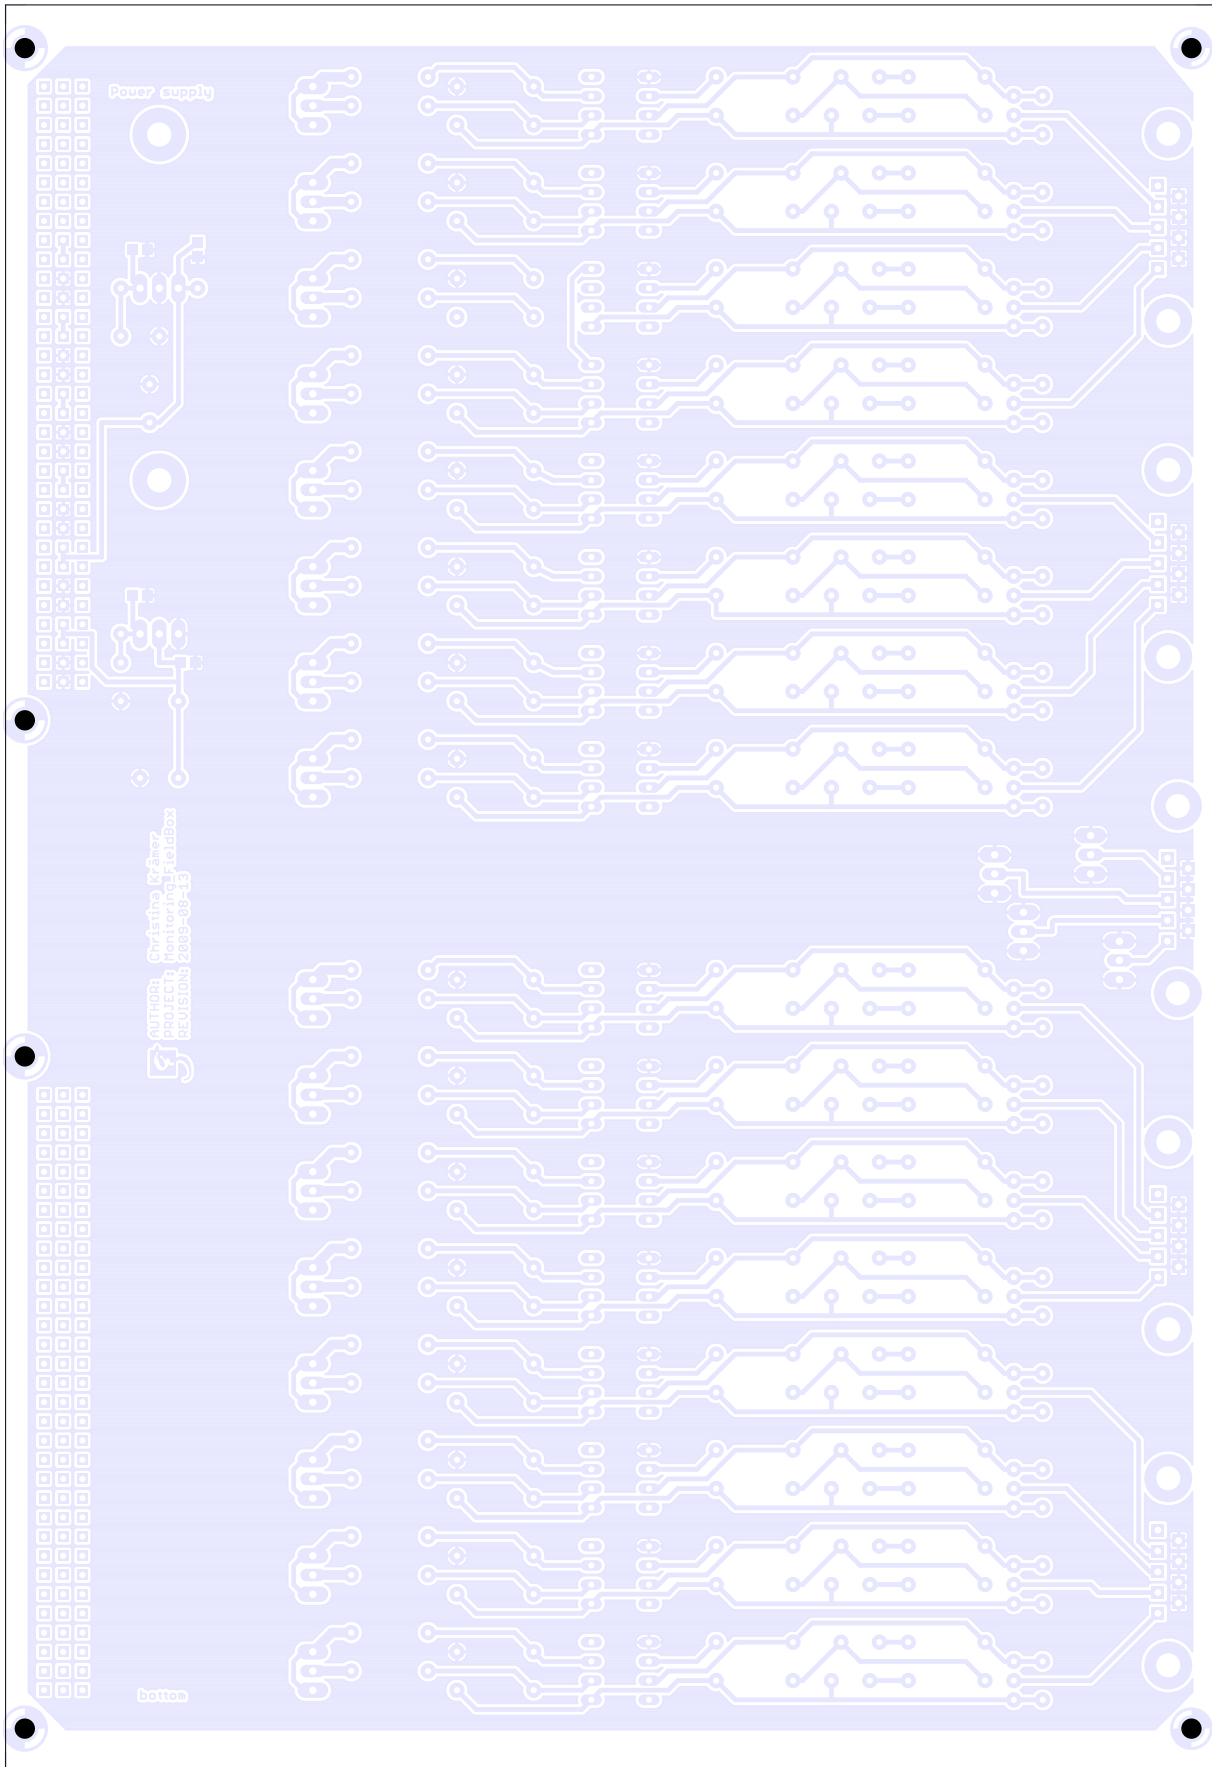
Board bottom view showing drills with 2.7 mm (0.106 in) diameter
